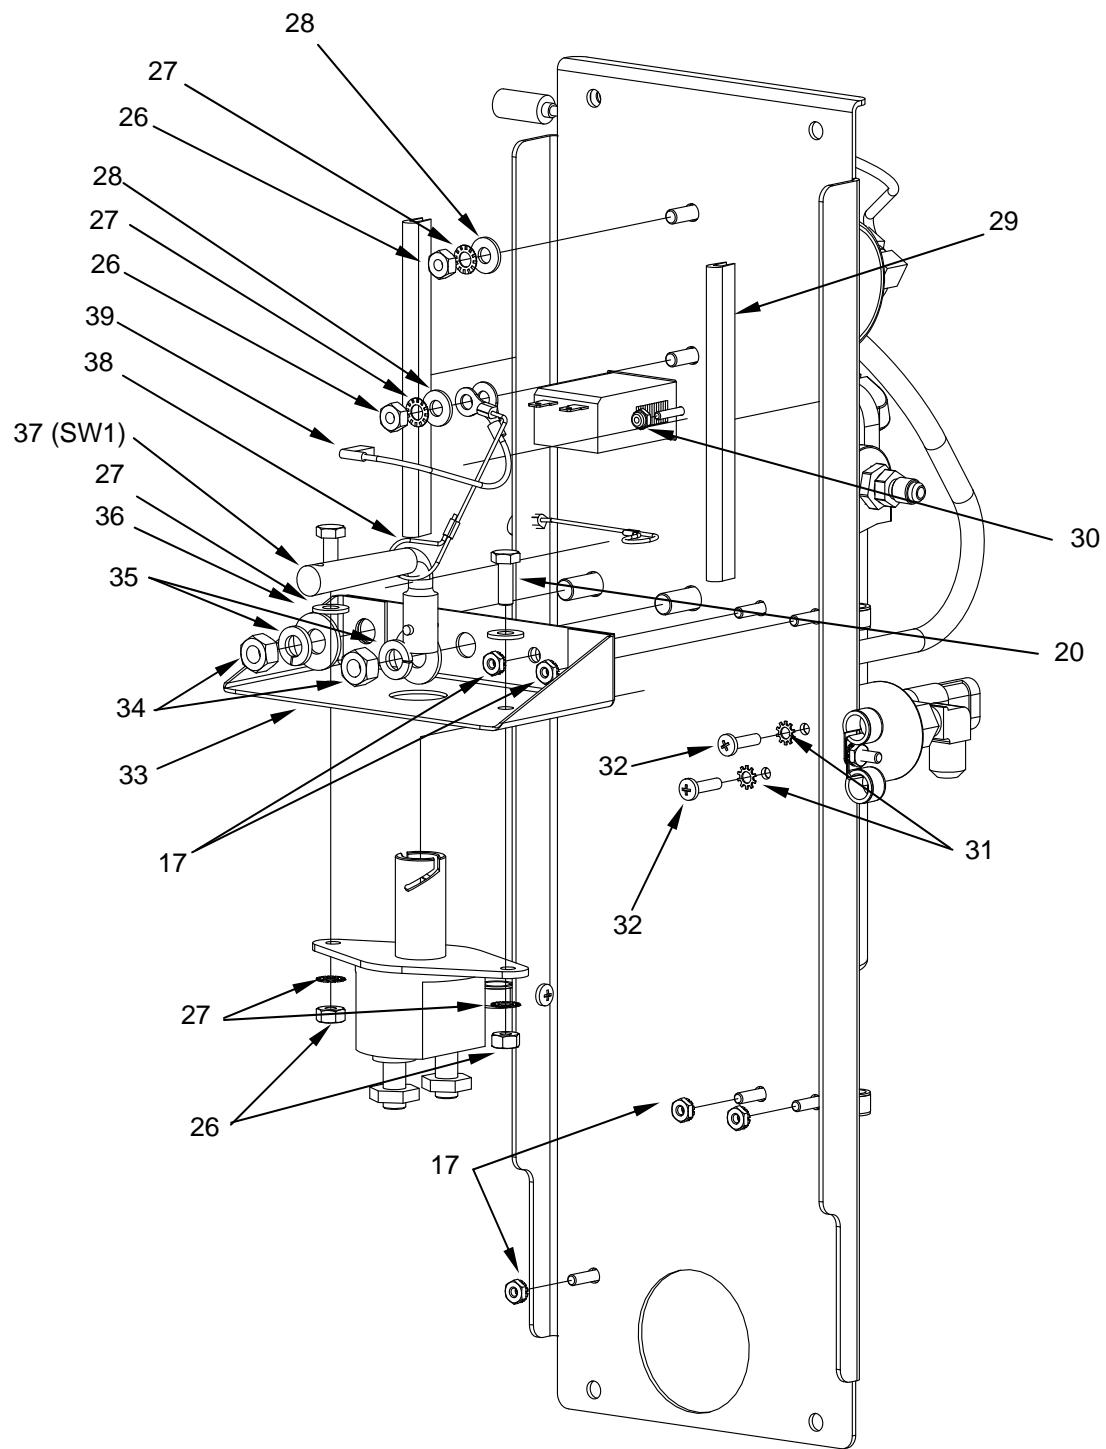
Fuel System Assembly (Sheet 3 of 4).
